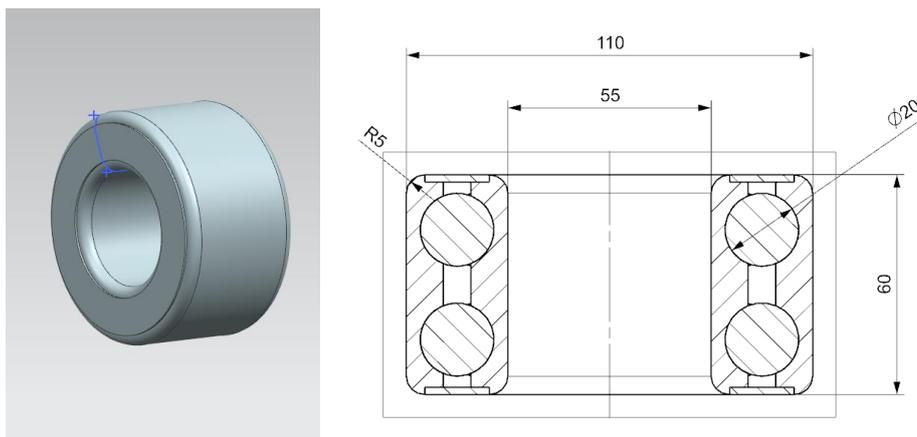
Bearings and its dimensions (1 mm : 10m) [Own Source] [Annex 9]
